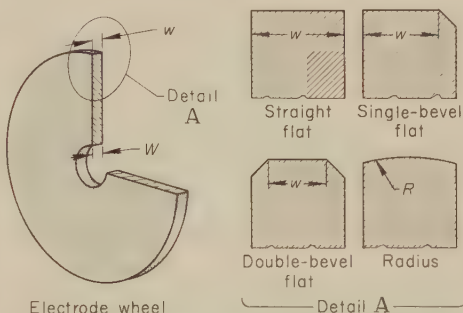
Four basic types of faces on electrode wheels used for seam welding. (W is wheel width and w is the width of contact surface on flat or beveled wheels.)
